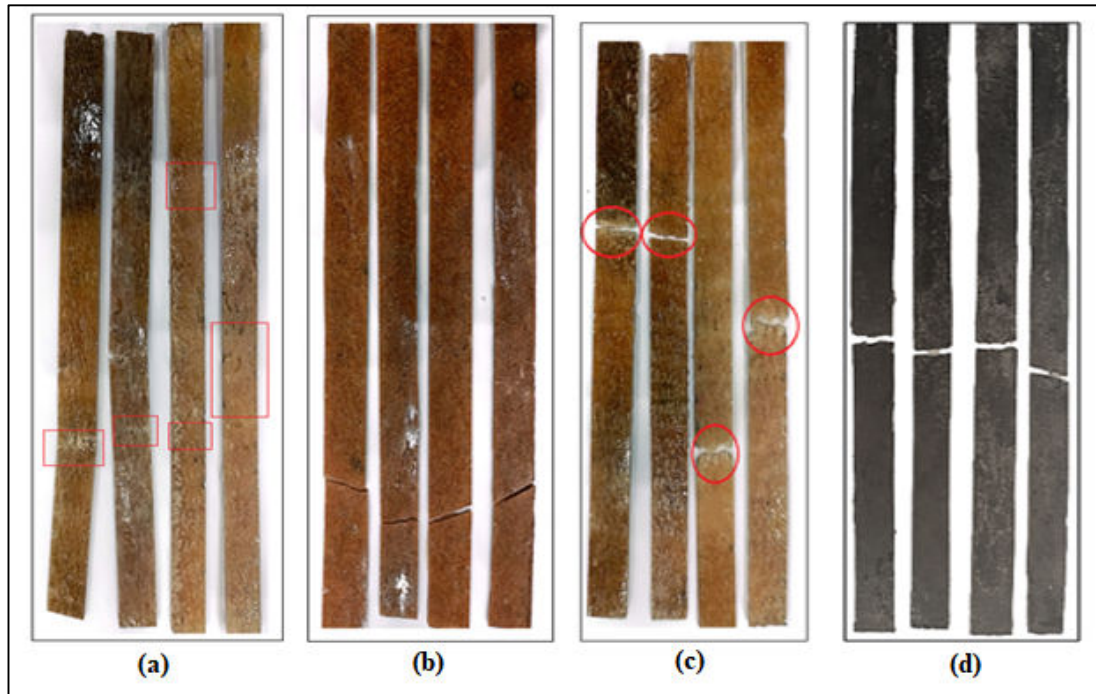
Tested Specimens Displaying Tensile Fracture.
